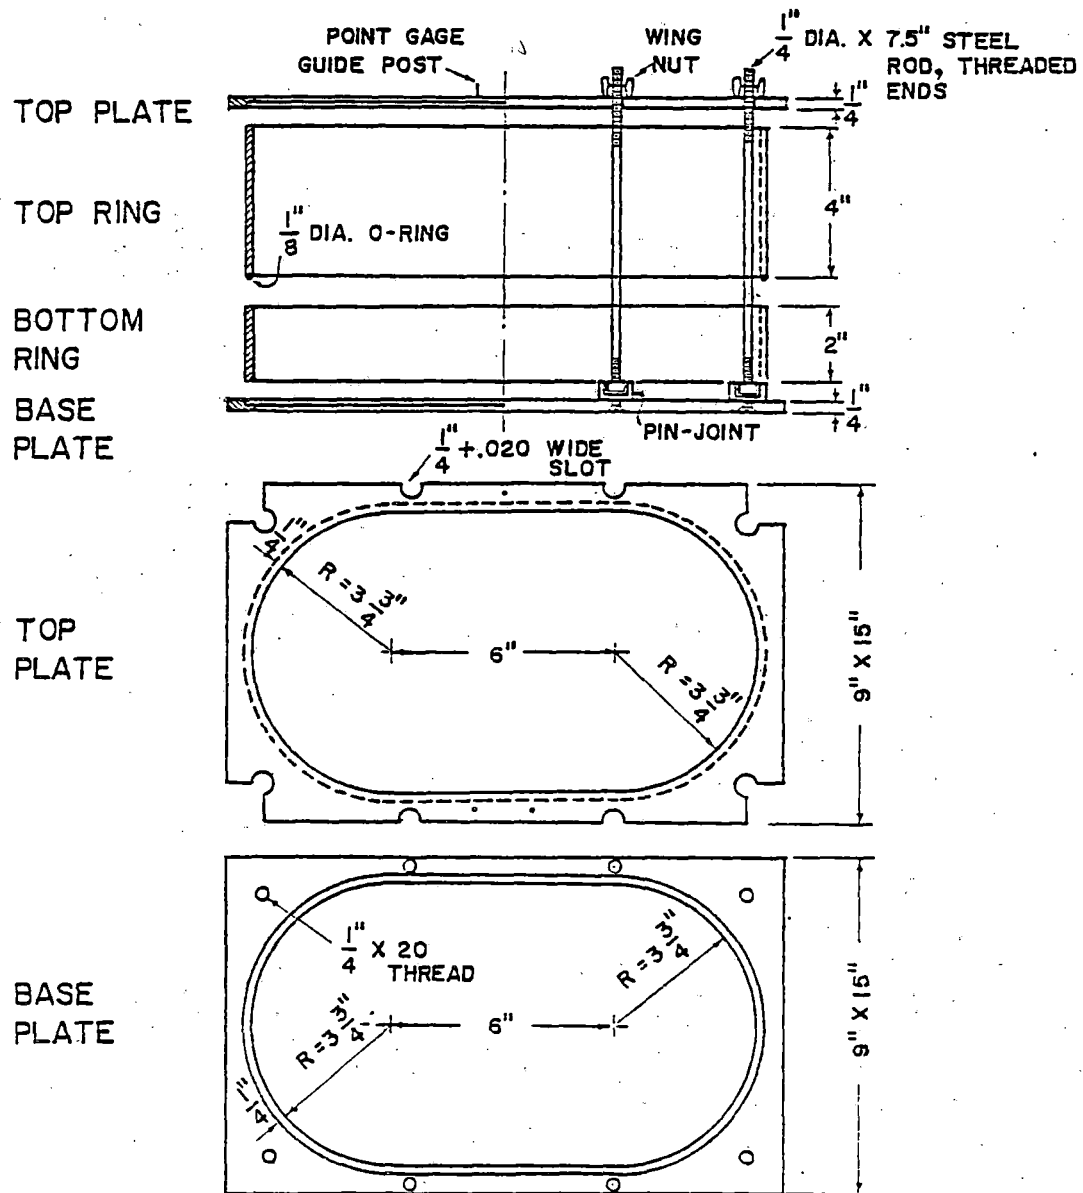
OVAL-SHAPE SURFACE RING DEVICE
